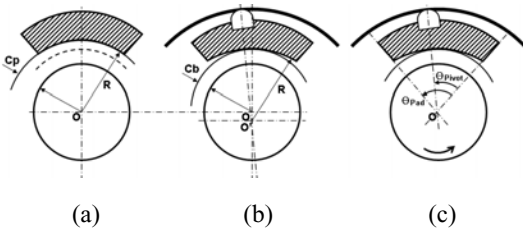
(a) Pad machined radial clearance, (b) bearing set radial clearance and (c) pivot offset diagrams
